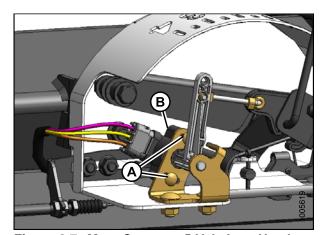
Most Common 5 Volt Auto Header Height Sensor Assembly
